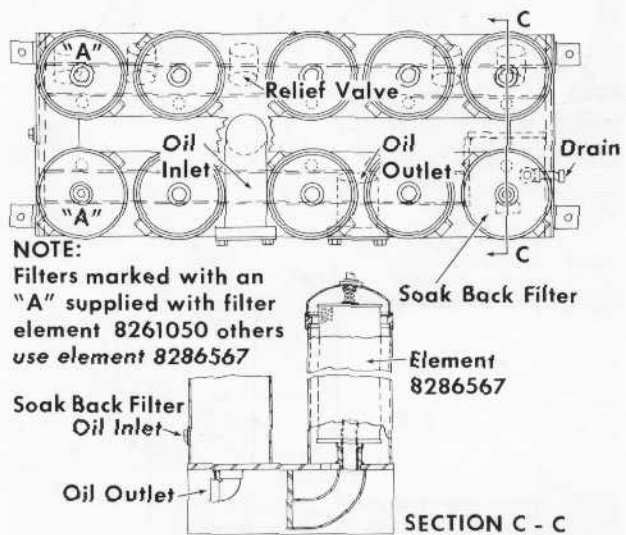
Cross-Section Drawing Of Multiple-Single Element Filter
